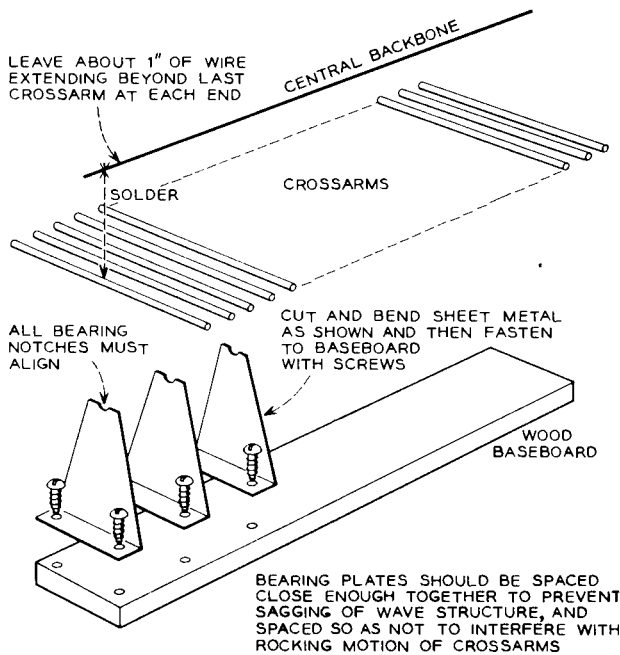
This exploded-view sketch shows the arrangement of the parts of the wave machine.
